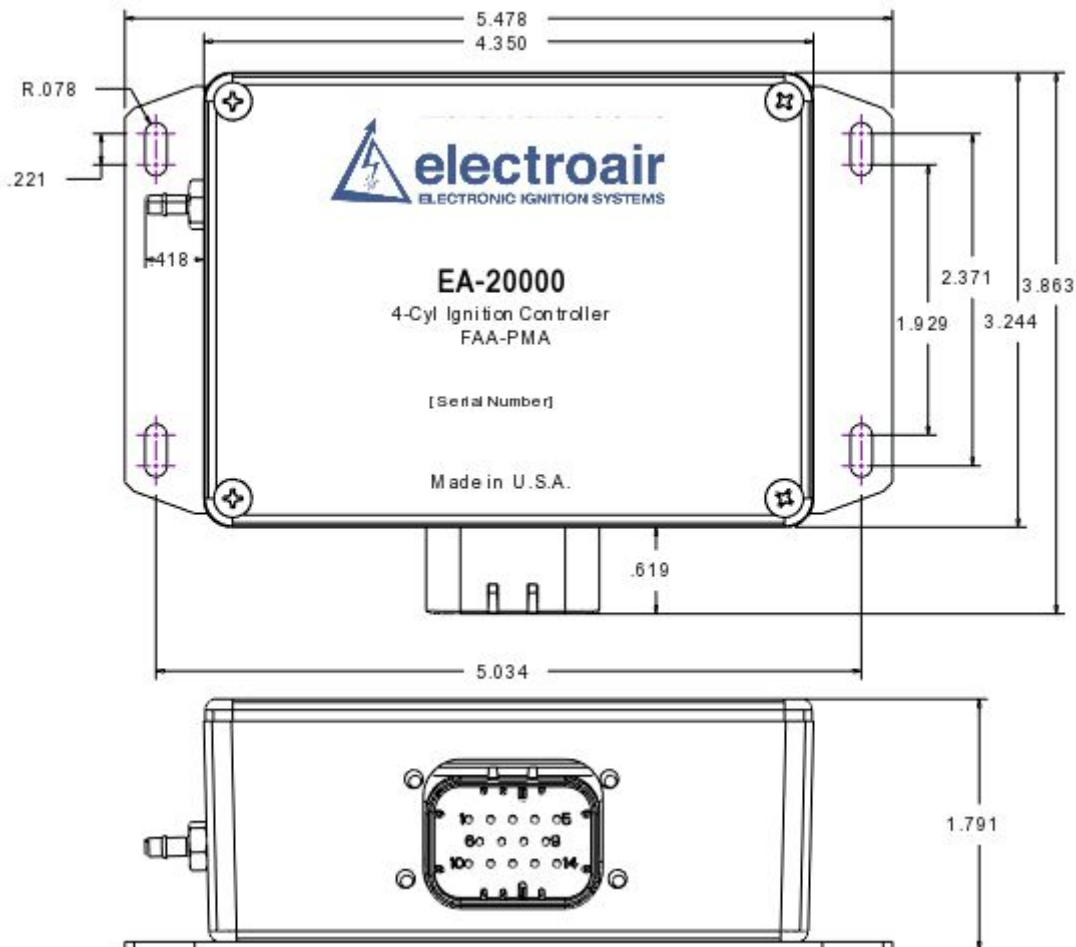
P/N EA-20000 Overall and Hole Dimensions
